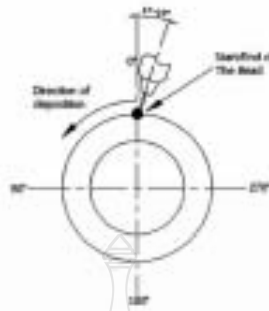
The welding Torch, in The Direction of The Rotation, Between 17-19°.
